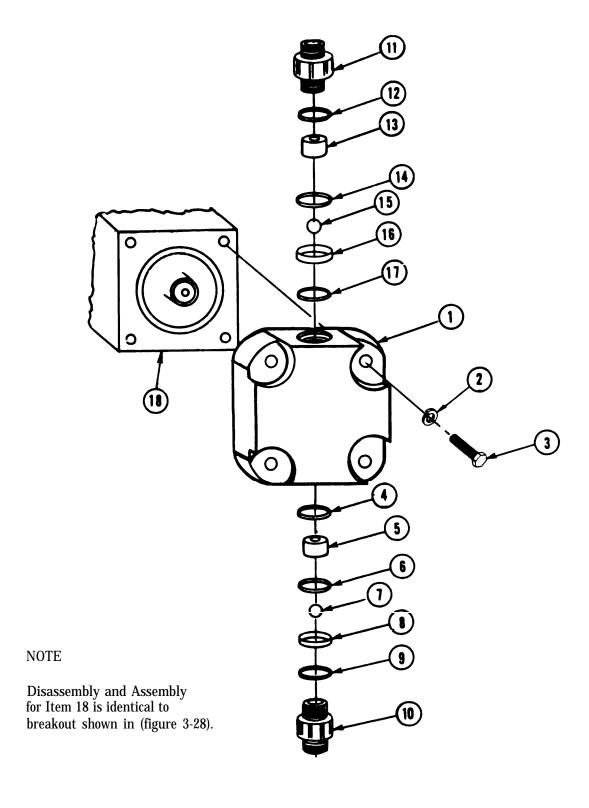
Chemical Feed Pump Head Assembly (USMC)
